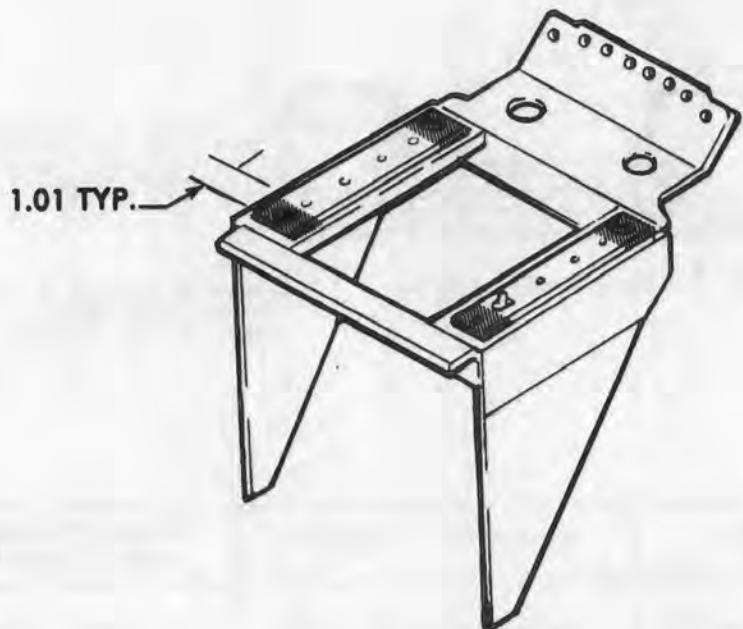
Driveshaft cover hinges and angles damage limits
